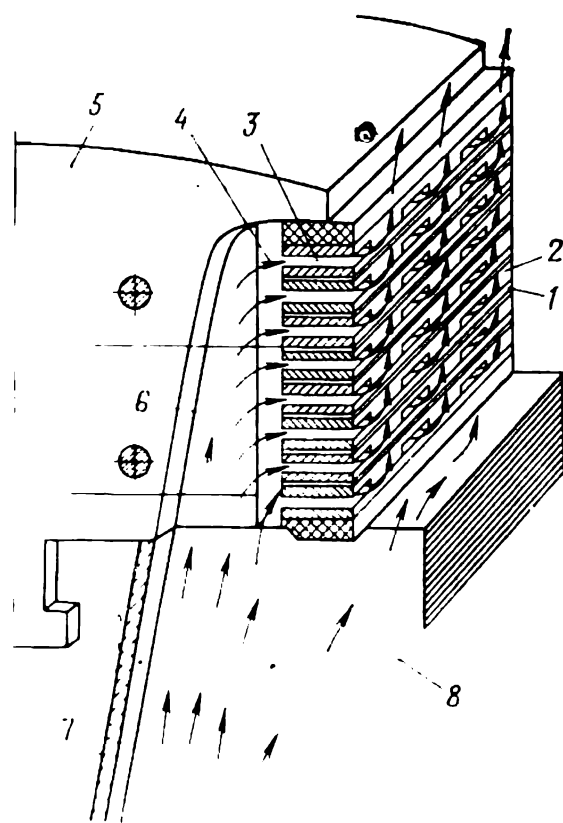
Direct air cooling of the rotor winding in a hydroelectric generator
